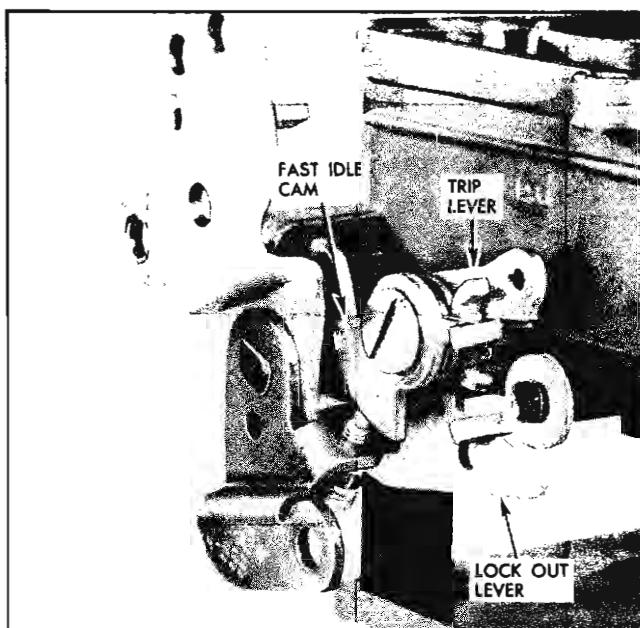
B-107 Location of Fast Idle Cam and Lockout Lever
